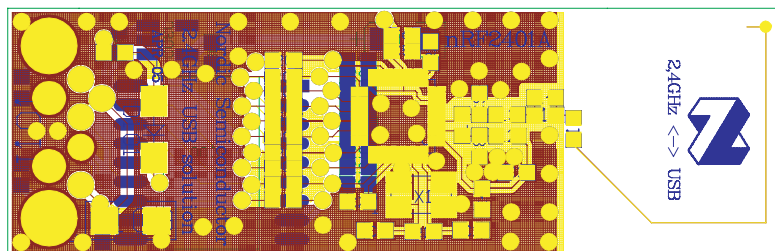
PCB layout ADNK-7053-ND24 wireless laser mouse designer's kit USB DuoCeiver™ dongle
